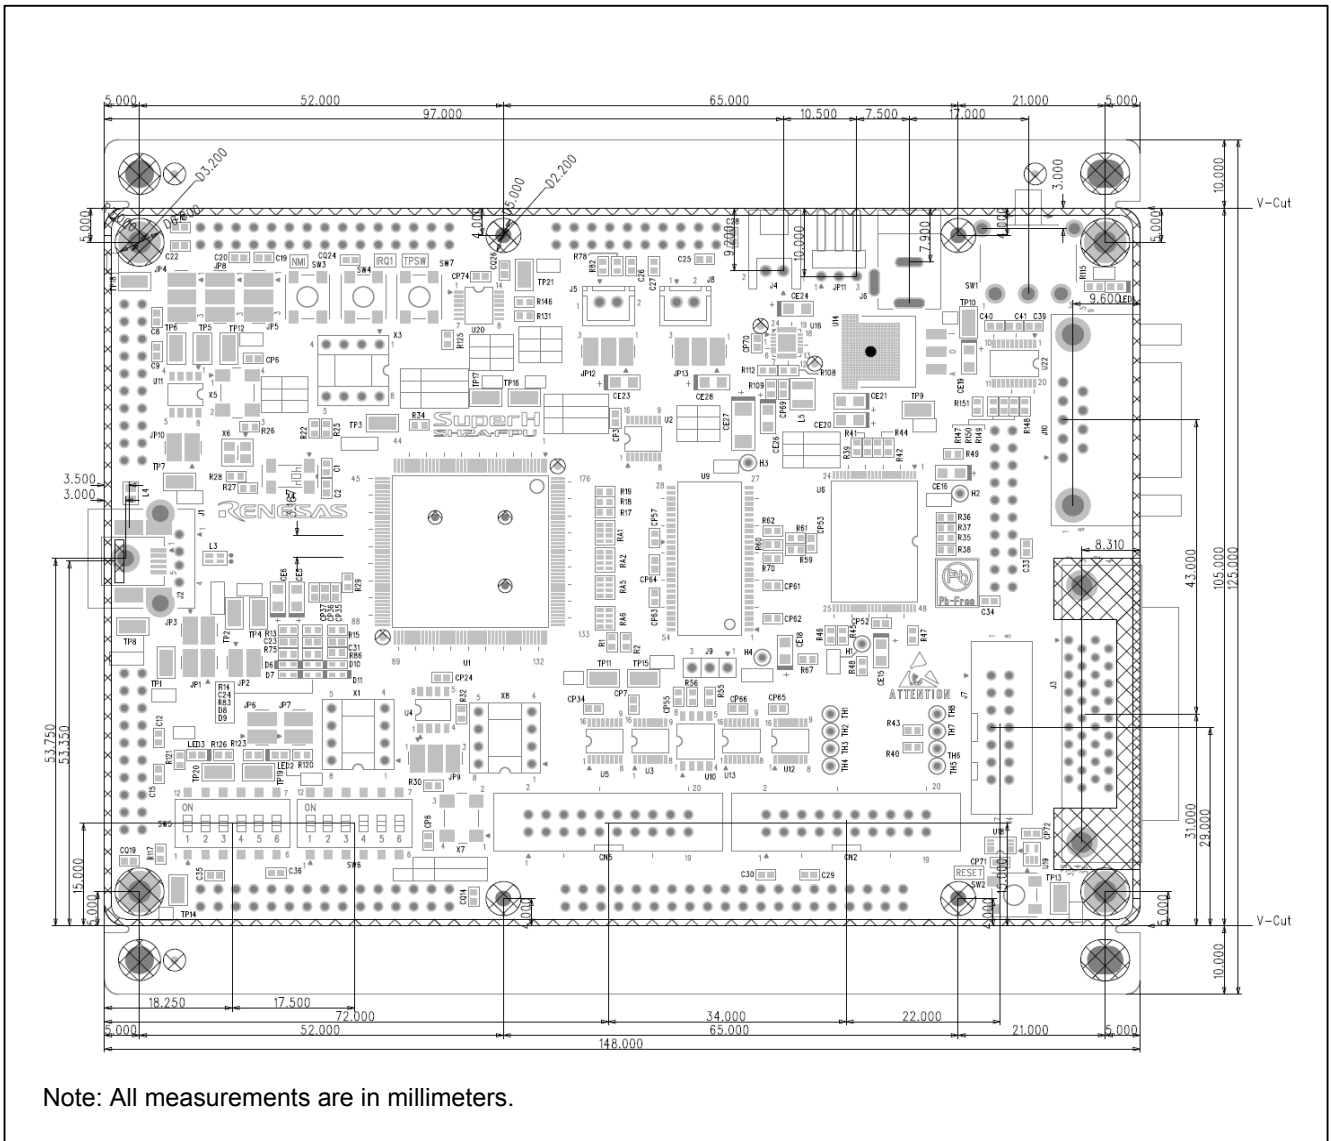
R0K572670C000BR Dimensions (Top View of the Component Side)
